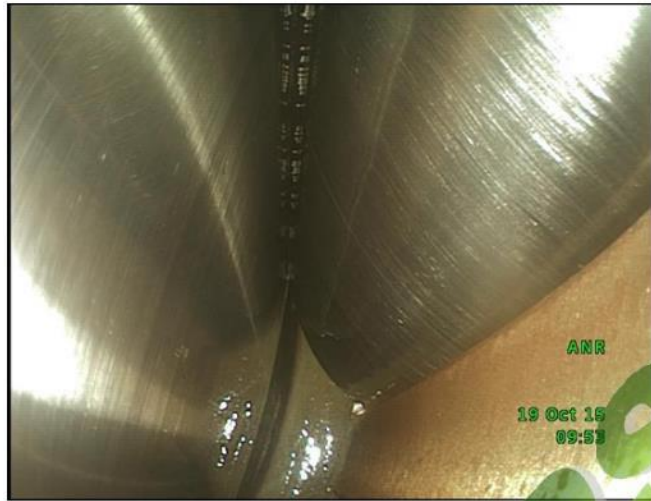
shows bearing position no. 5, the bearing of the planet carrier at generator side. The bearing shows no irregularities.
